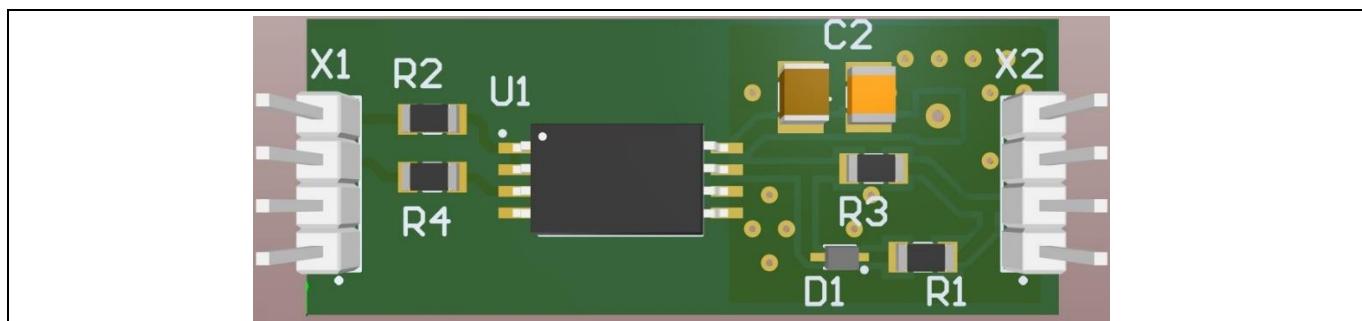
3D PCB view for gate drive optocoupler design with ACNU-3430
